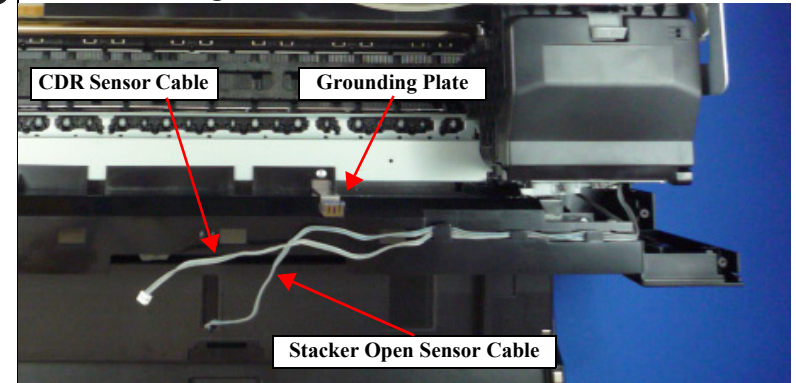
Through the CDR Sensor Cable and Stacker Open Sensor Cable
